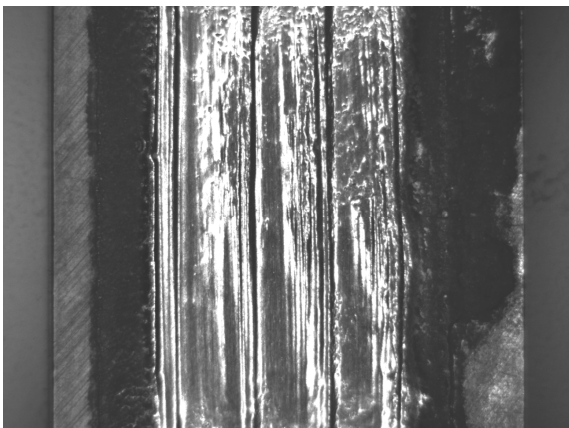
Surface layer of the test sample from the 32CrMoV12-28 tool steel after wear test alloyed VC, (power range 1.6 kW), magnification 10x
